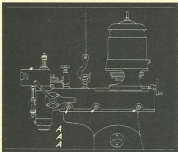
Lifting Machine with Eye-bolt in Sliding Head
